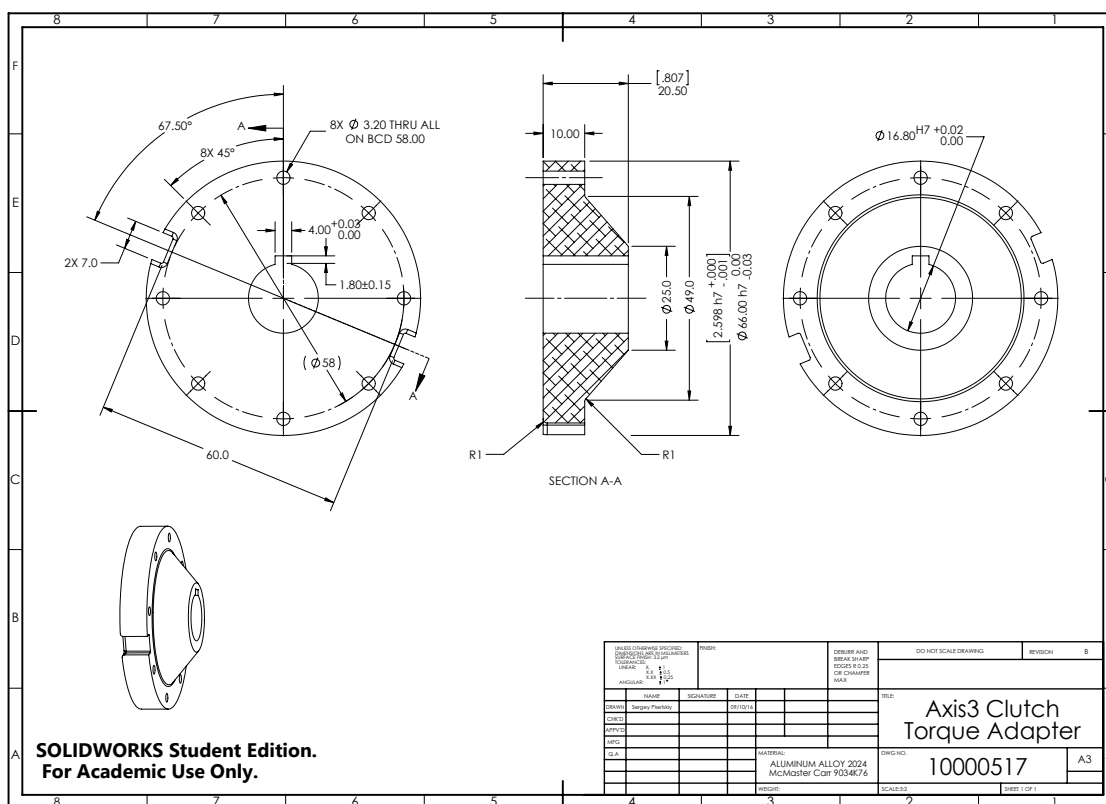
Drawing: Joint 3 clutch torque adapter.
